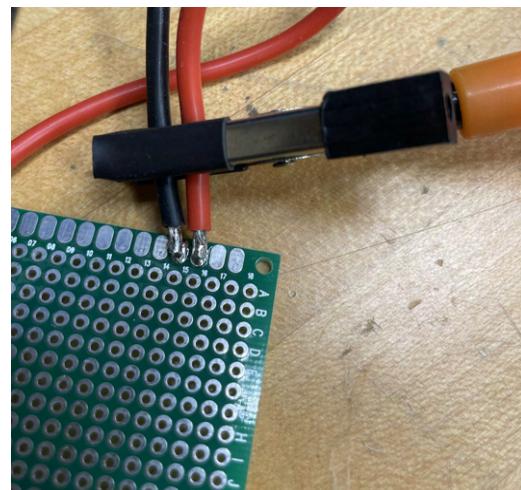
Using helping hands to hold wires down on the board for solder
